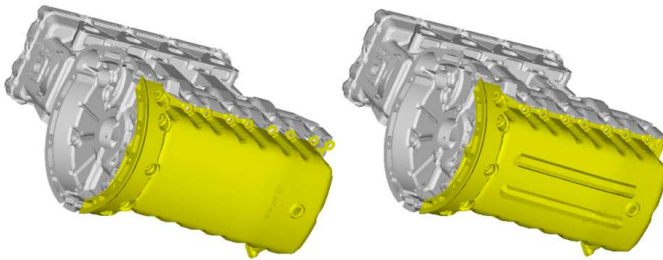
Oil pan reinforcement using beads: Nominal (left) and beaded (Right)
